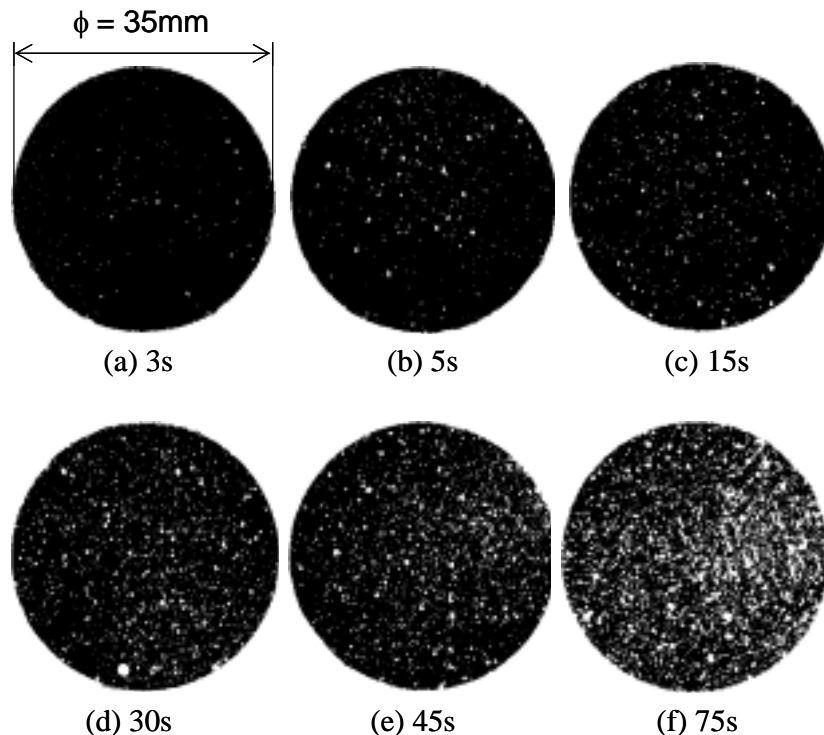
Sprayed lubricant on BTB examination paper fixed on tool surface
